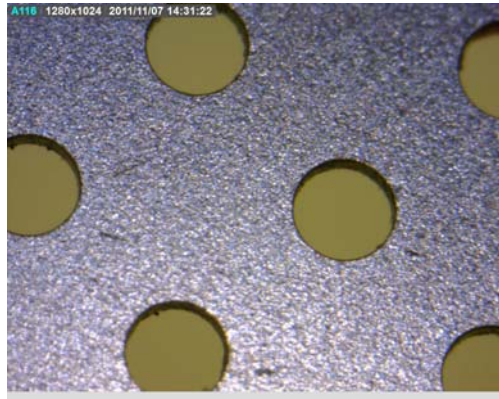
Example of stencil cut on a modern fiber laser stencil cutter
